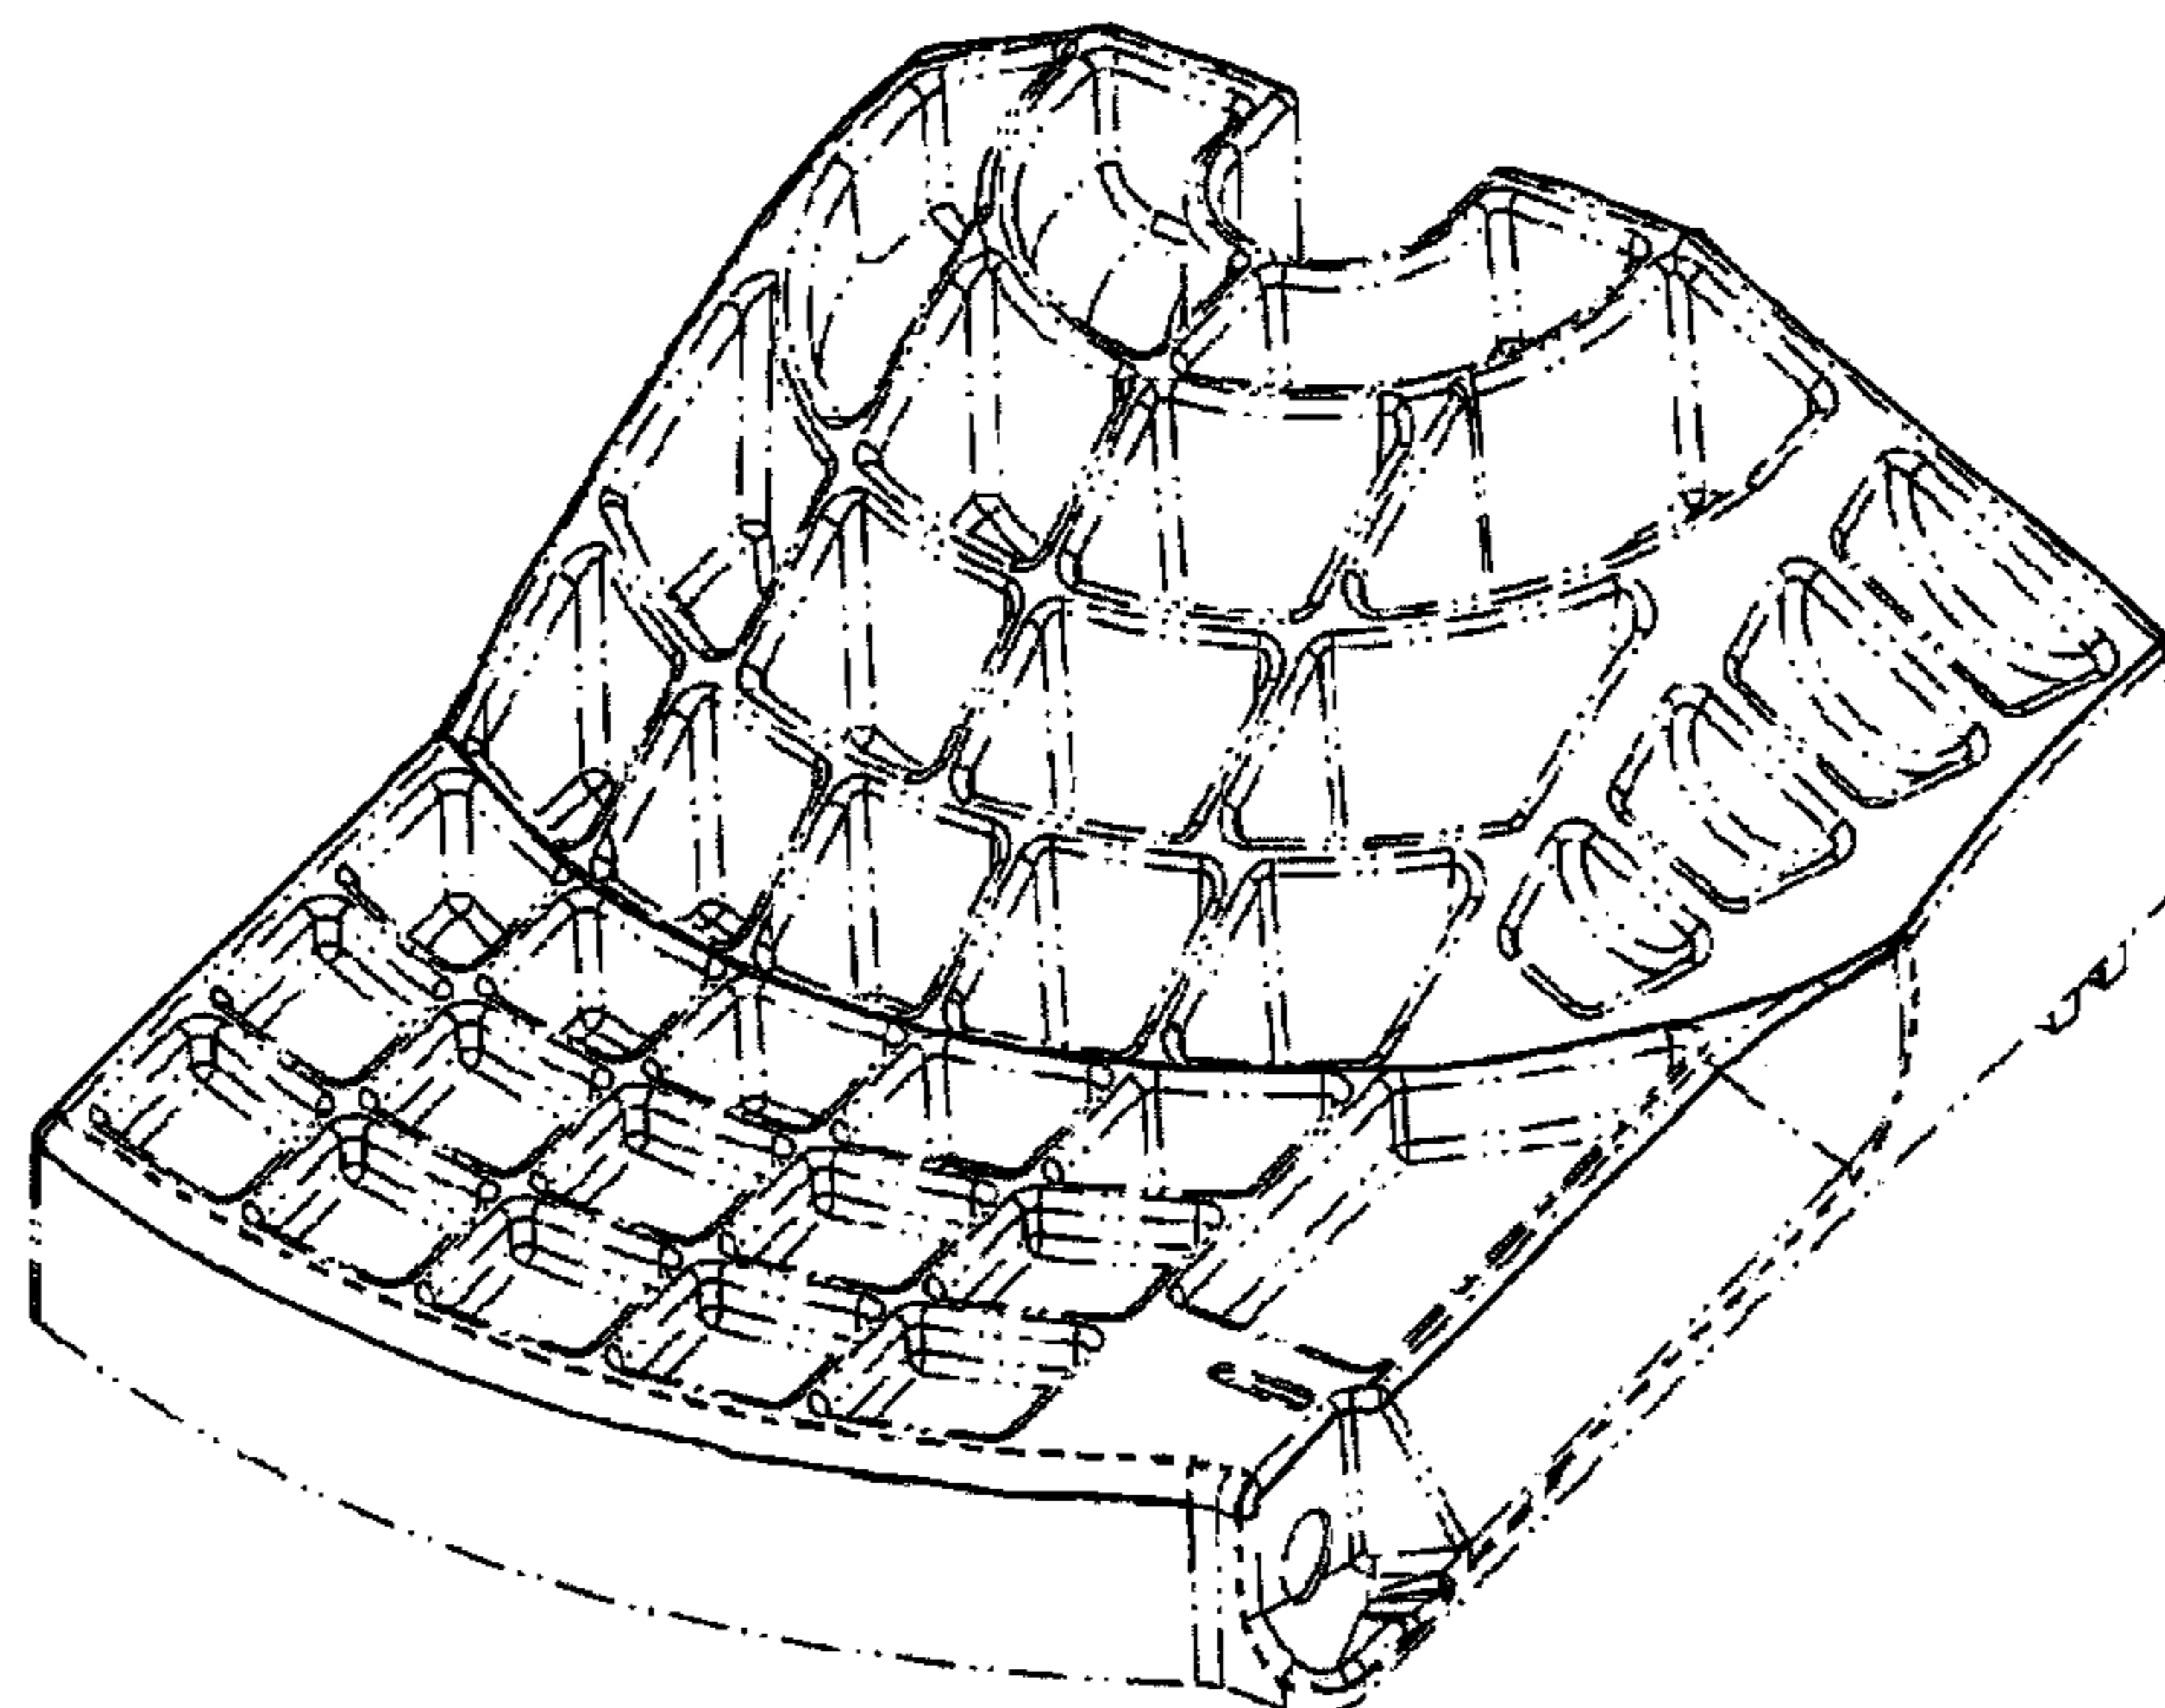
is a front side view of the embodiment shown in FIG. 1;
